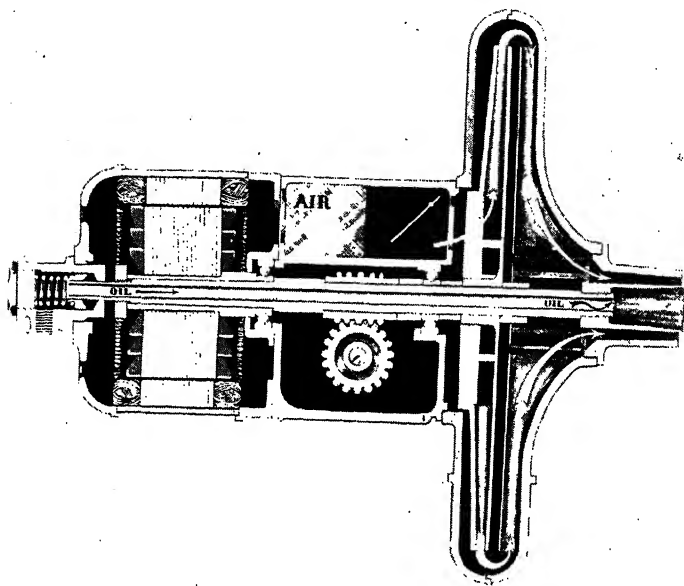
Conventional method of mounting motor, fan, atomizer, and pump-drive gear on single shaft. (Courtesy of Ace Engineering Company.)
